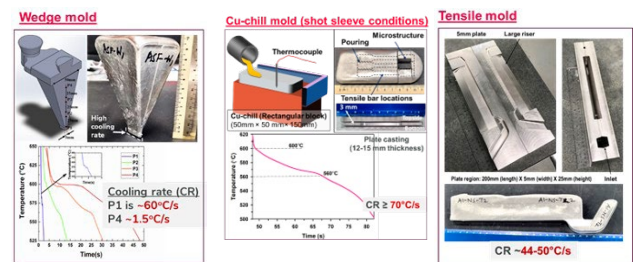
Experimental Techniques used for the development of alloys using recycled materials to meet the primary alloy requirements.
